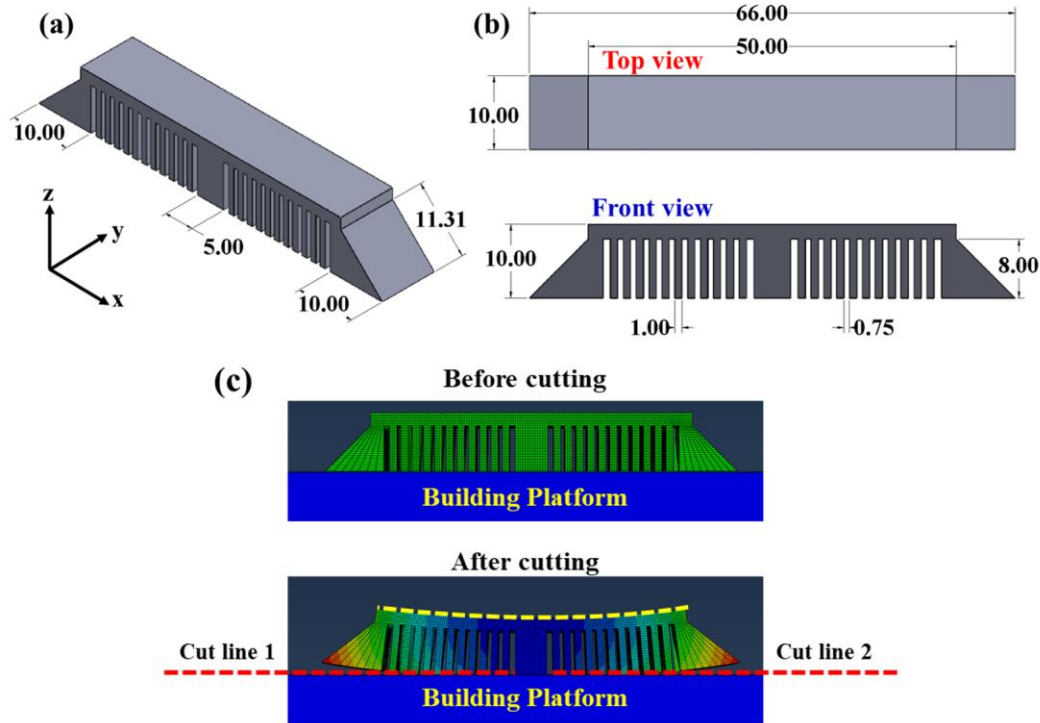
(a) the 3D design and (b) the top and front view of the cantilever, showing the dimensions (in mm), and (c) the schematic view of the fabricated cantilever, before and after cutting the sides.
